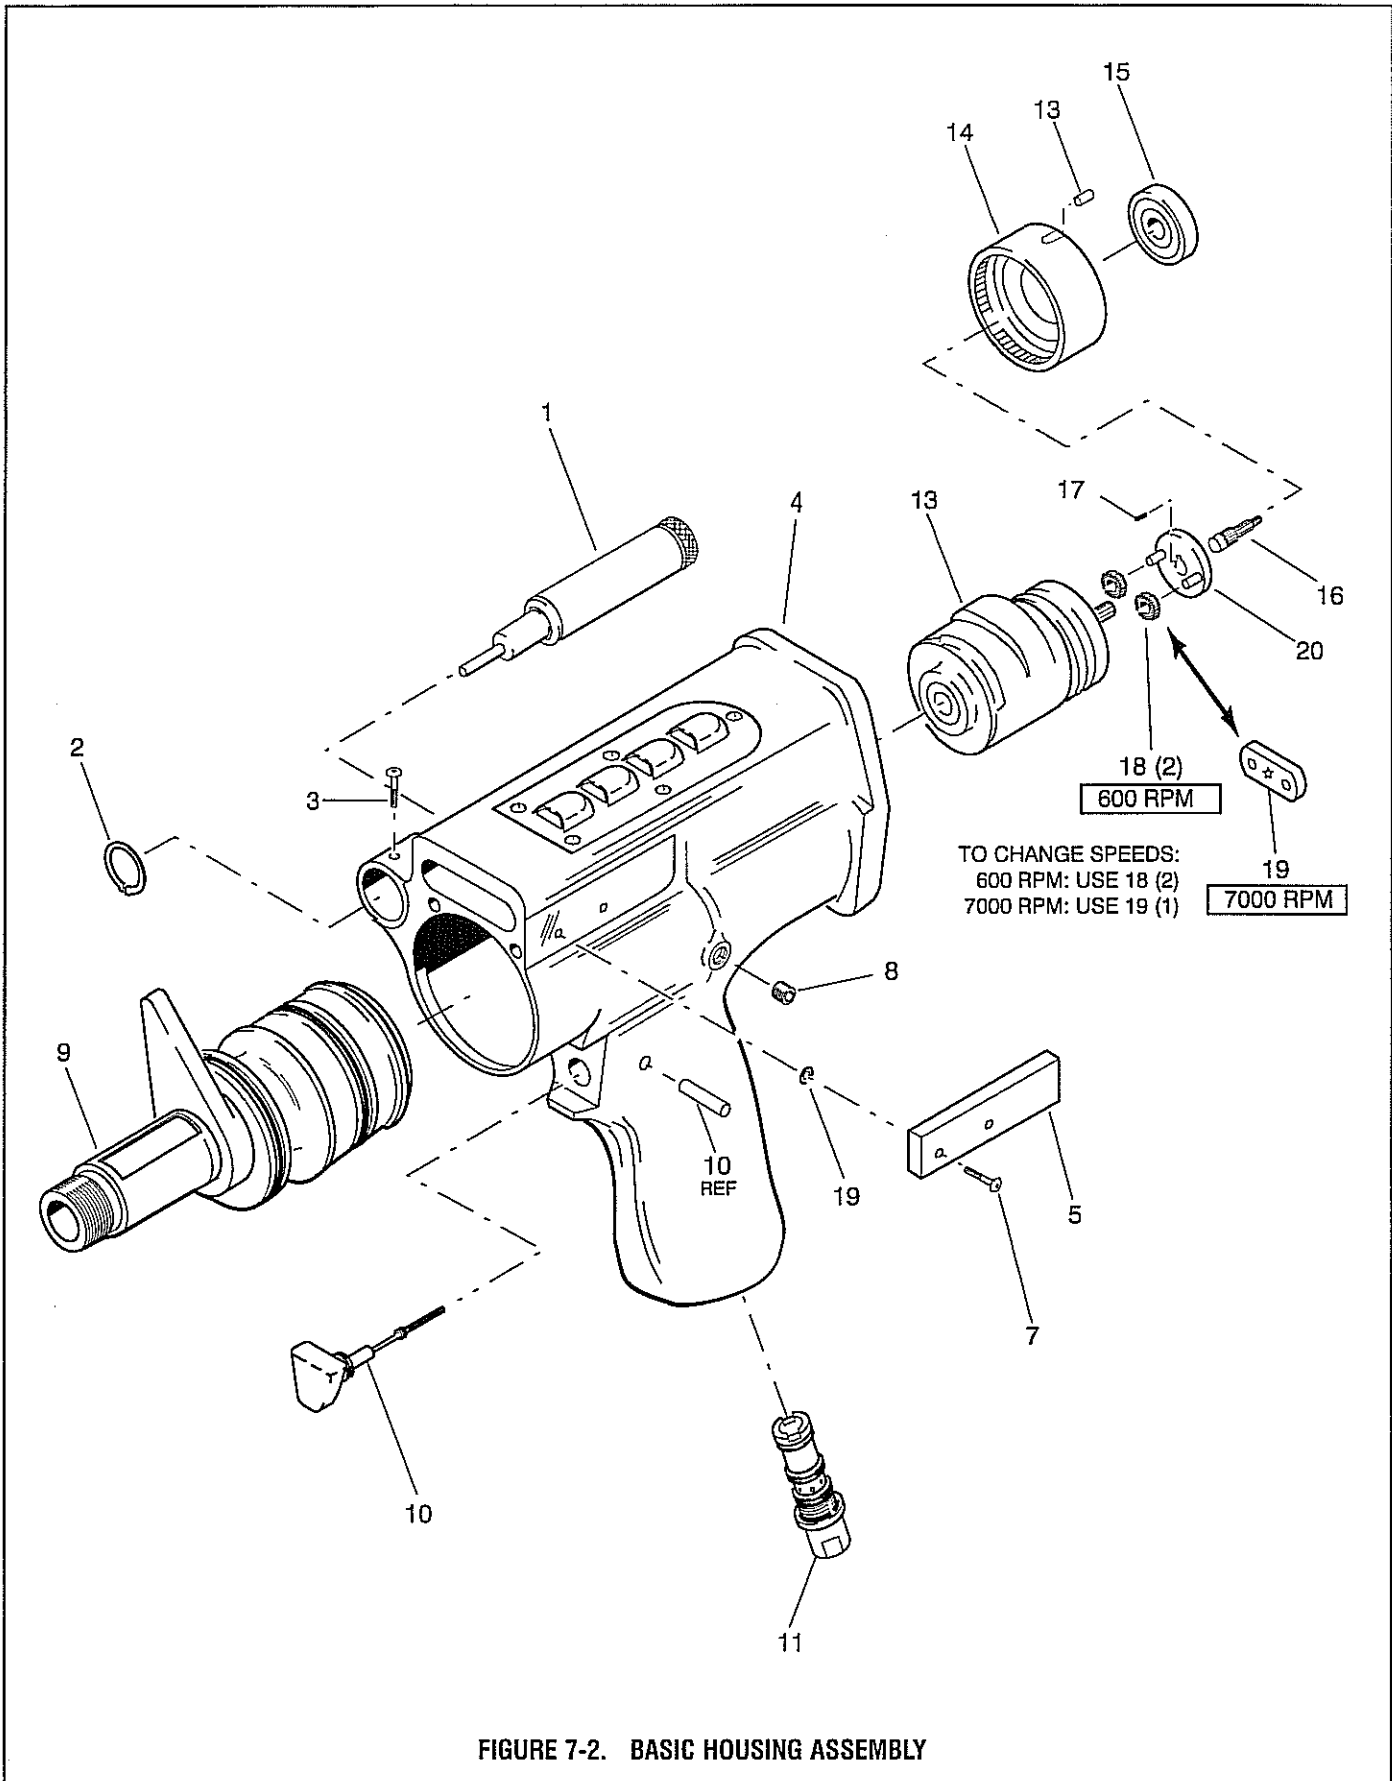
BASIC HOUSING ASSEMBLY
